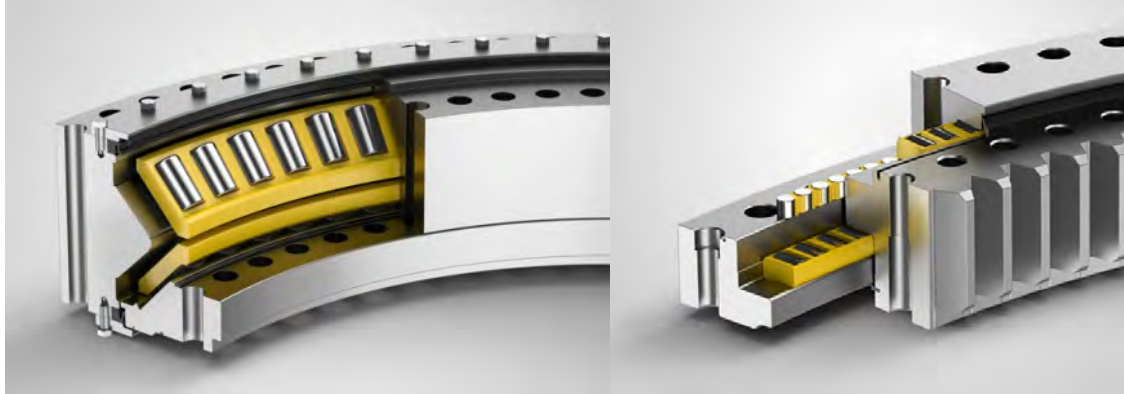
Double row angular contact roller slewing bearing (left) and triple row roller slewing bearing (right) [39].
